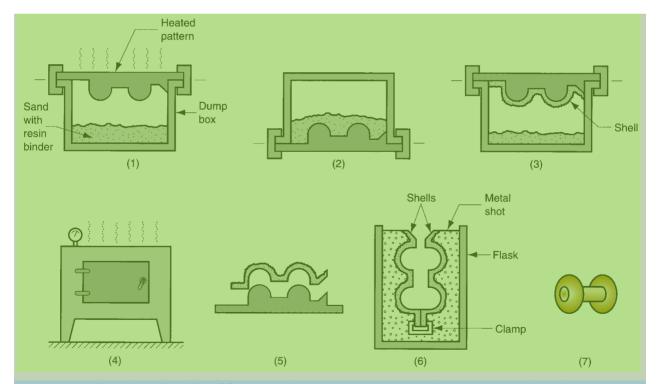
Steps in shell-molding: (1) a match-plate or cope-and-drag metal pattern is heated and placed over a box containing sand mixed with thermosetting resin; (2) box is inverted so that sand and resin fall onto the hot pattern, causing a layer of the mixture to partially cure on the surface to form a hard shell; (3) box is repositioned so that loose, uncured particles drop away; (4) sand shell is heated in oven for several minutes to complete curing; (5) shell mold is stripped from the pattern; (6) two halves of the shell mold are assembled, supported by sand or metal shot in a box, and pouring is accomplished. The finished casting with sprue removed is shown in (7).
